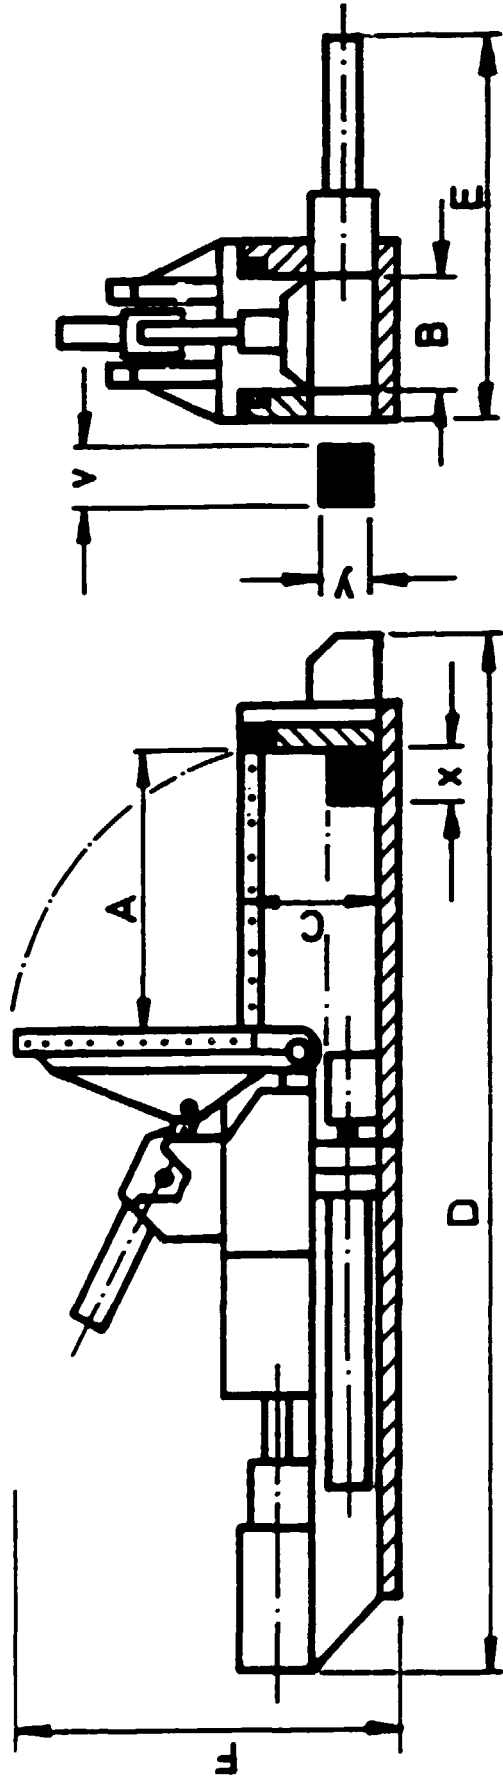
/14 shows a mobile model equipped with a feeding crane. Crane and baling press are hydraulically controlled and driven by an electric motor. (Electric motor, switch box, hydraulic valves, cylinder for upper compression ram with shear knives to cut overhanging material off, cylinder for side eject). This baling press is manually controlled, equipped with necessary safety devices.
